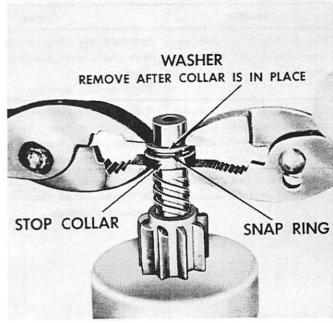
Installing Pinion Stop on Motor with Delco-Remy Inertia Type Drive
